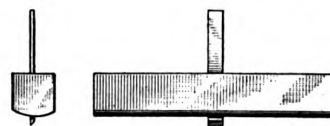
Front and Side Elevations of Router.—Scale, 6 Inches to the Foot.
